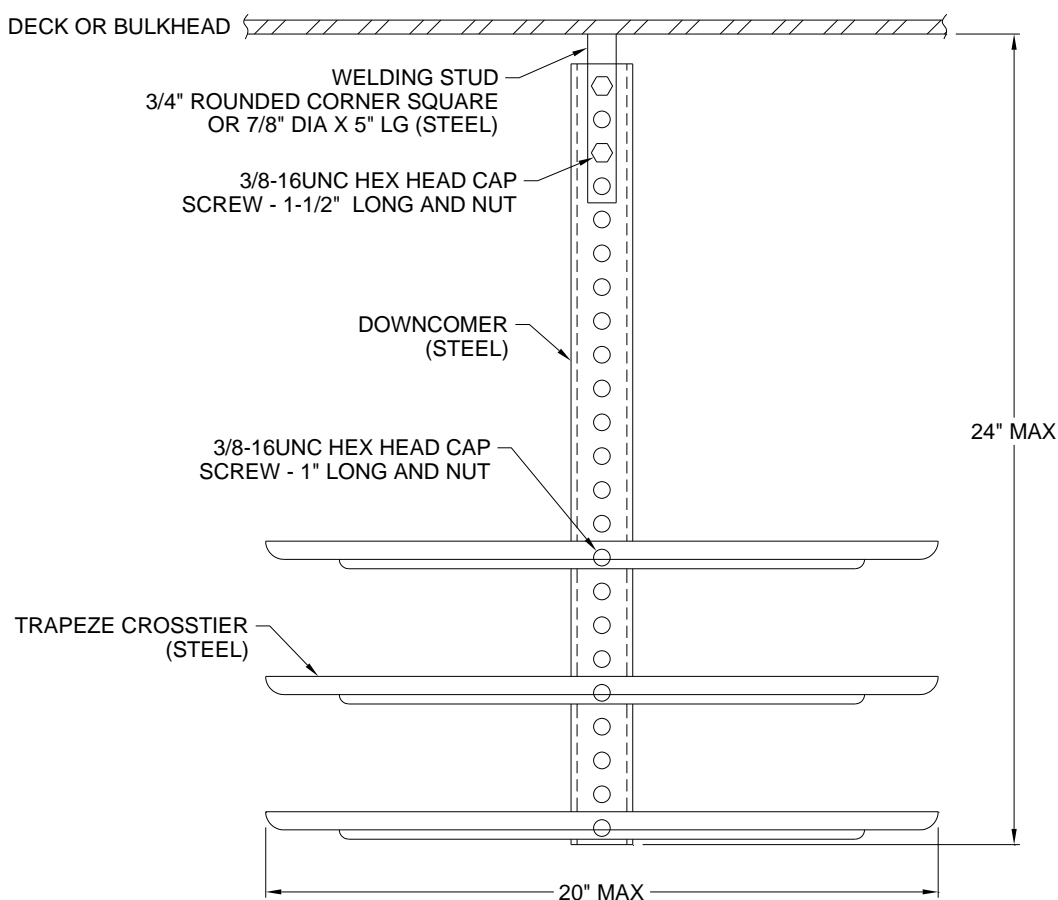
B103. Multiple cableways on steel decks and bulkheads (surface ships) – Continued.
